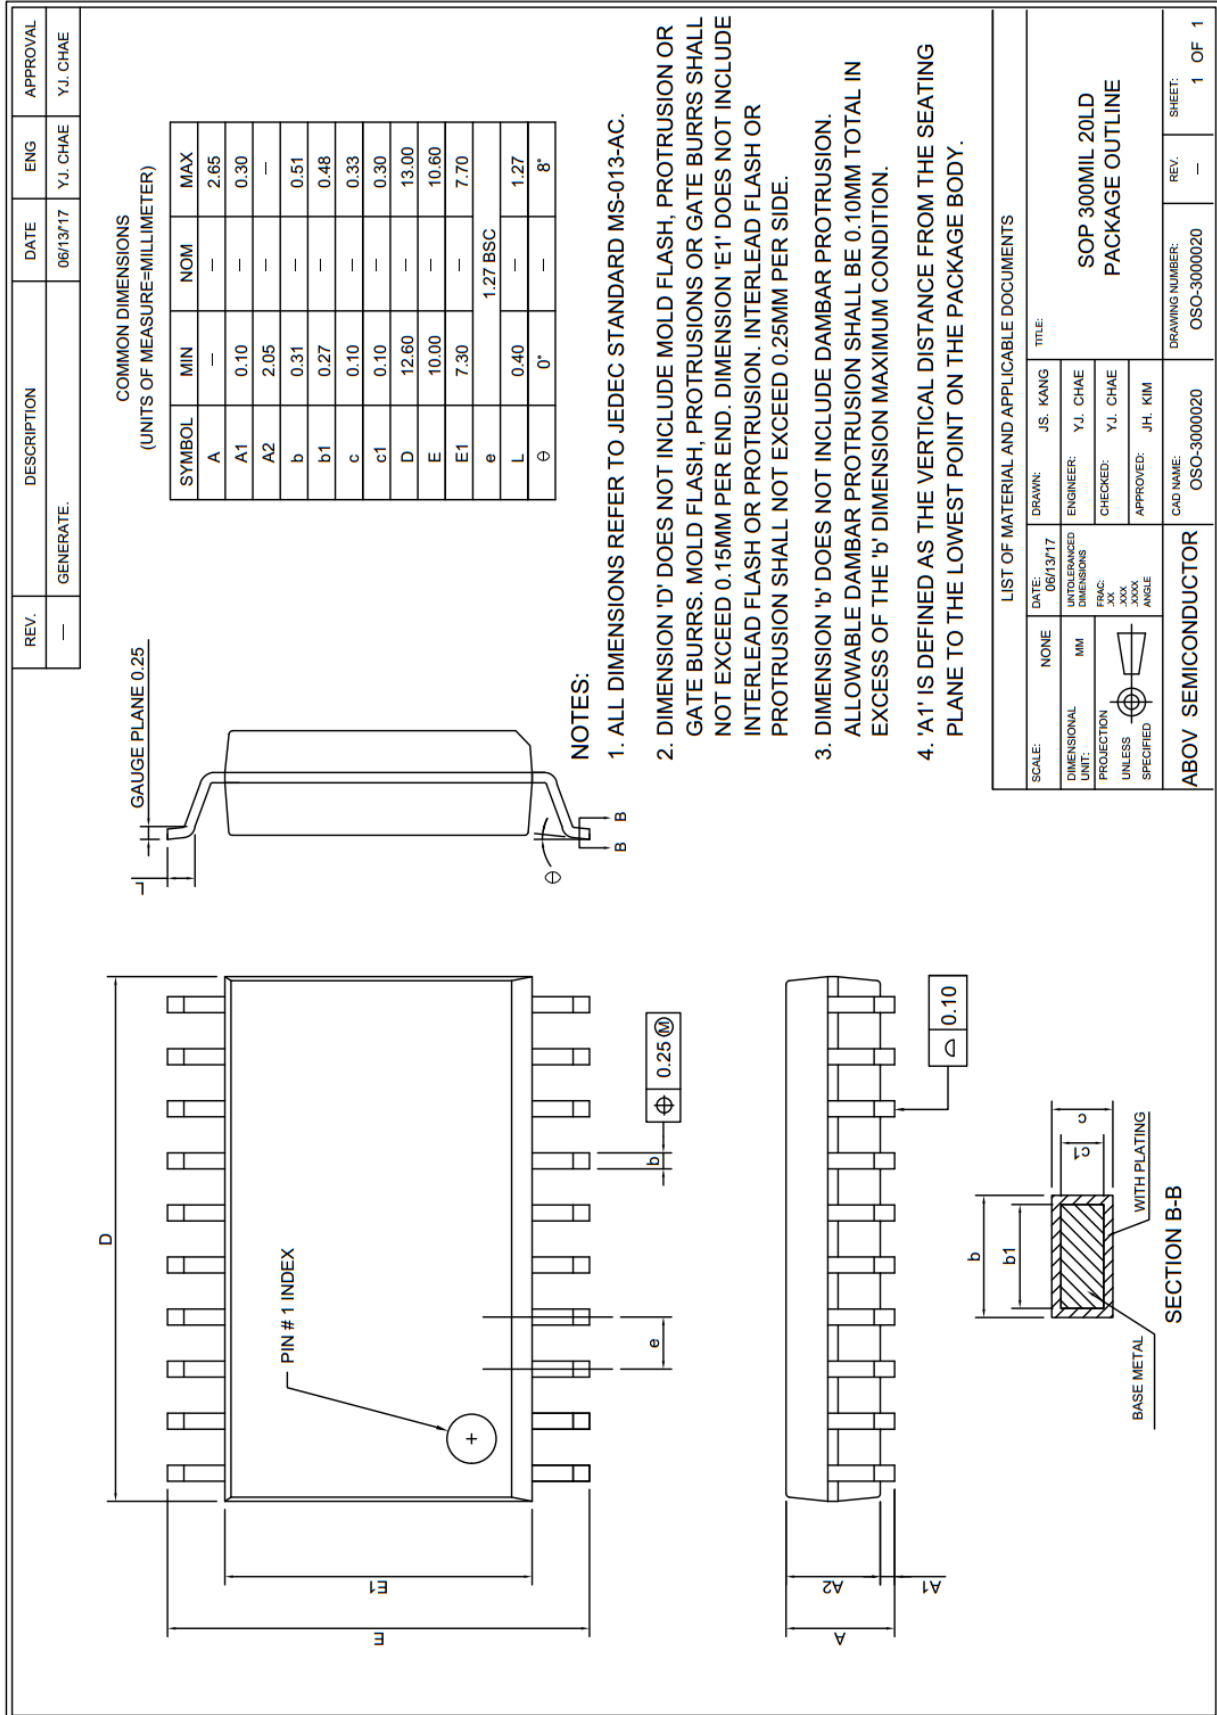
A94B114FD (20-SOP) Package Dimension
